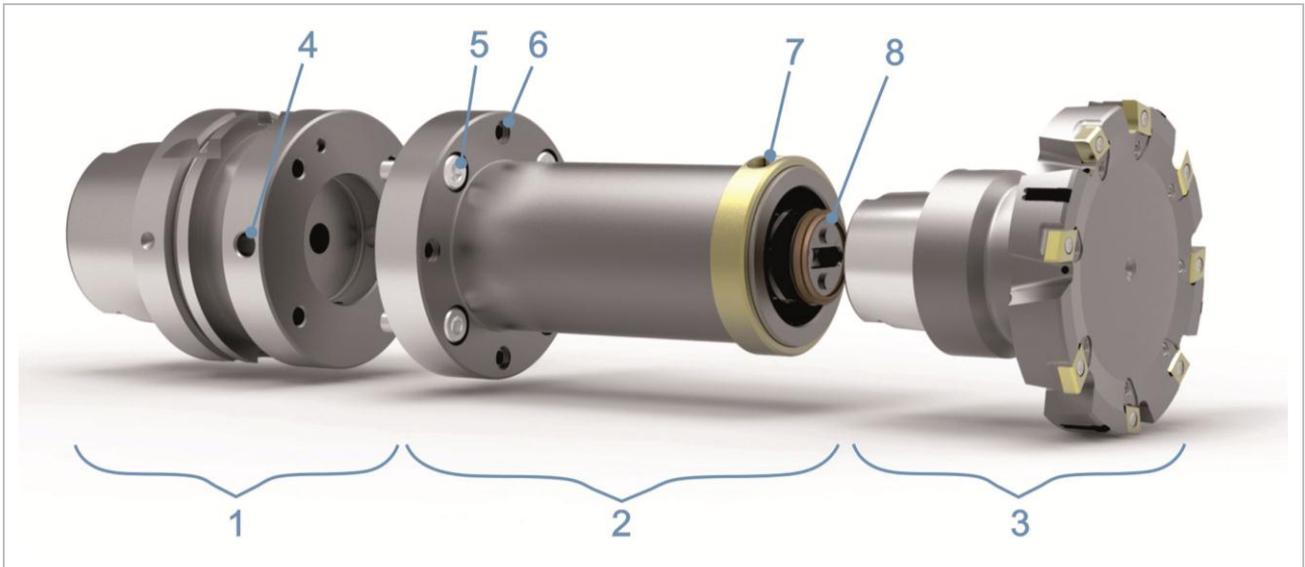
Individual components of the fine boring tool system with TFB fine boring head
